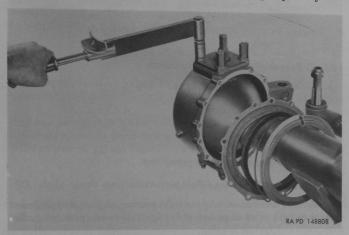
Checking steering knuckle trunnion support bearing adjustment.
